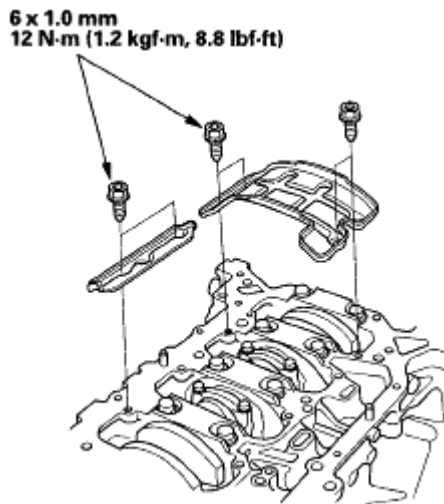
Identifying Baffle Plates Bolts With Torque Specifications
